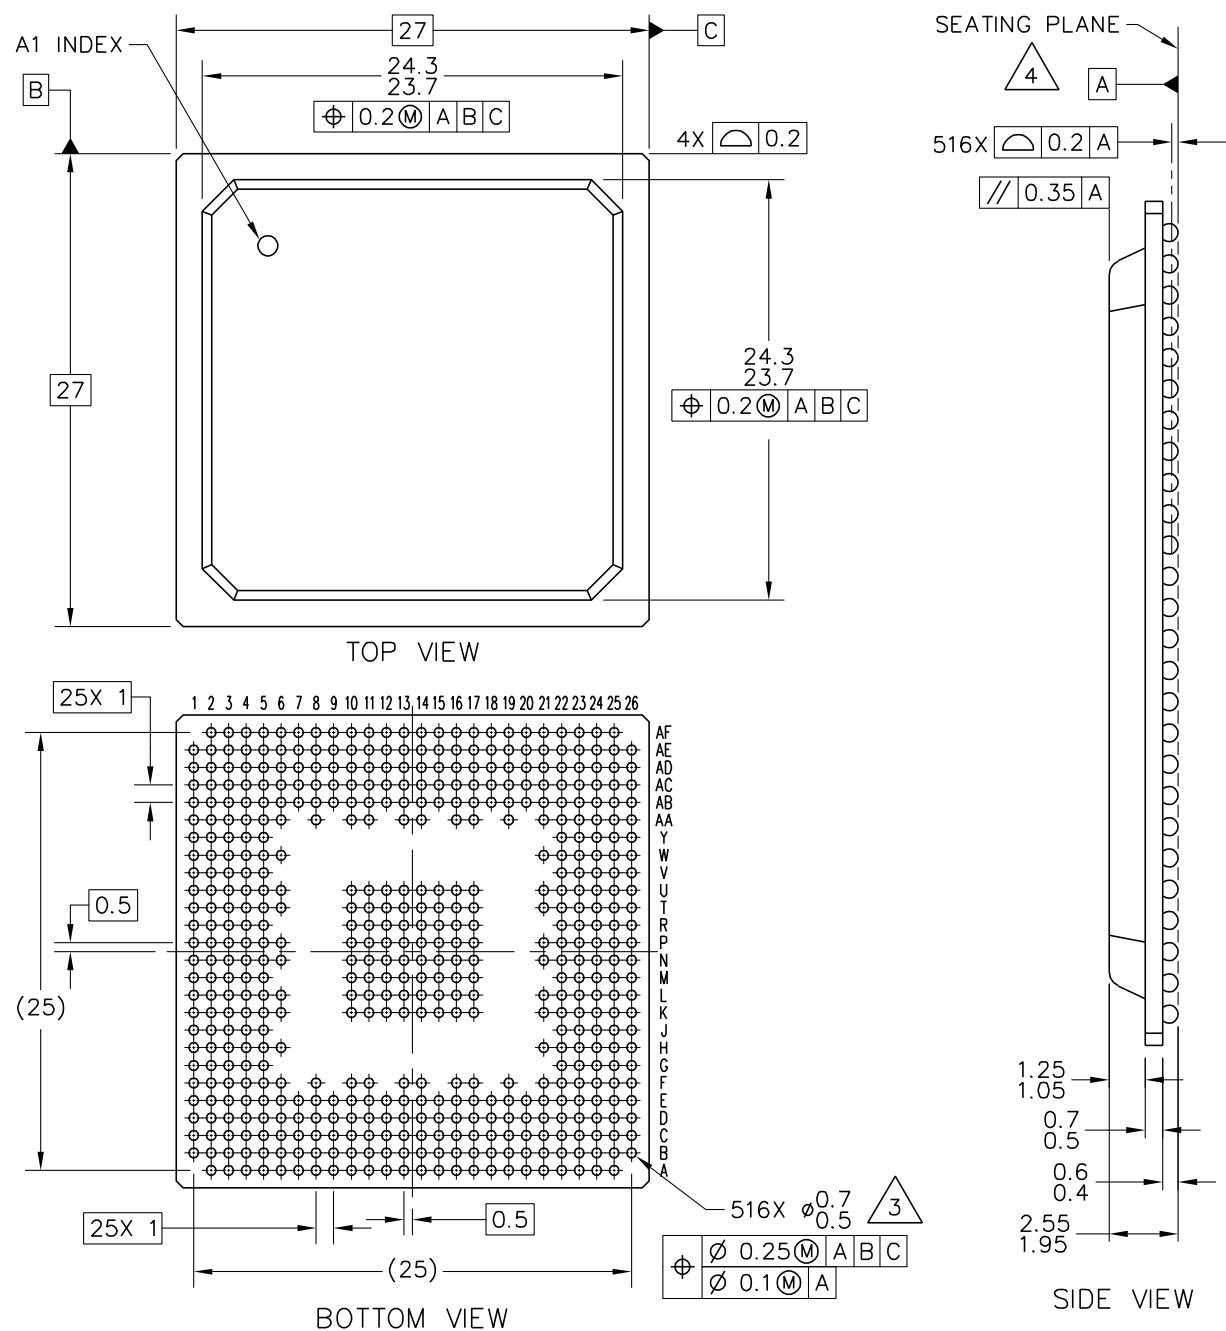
Mechanical Dimensions and Bottom Surface Nomenclature—516 PBGA
